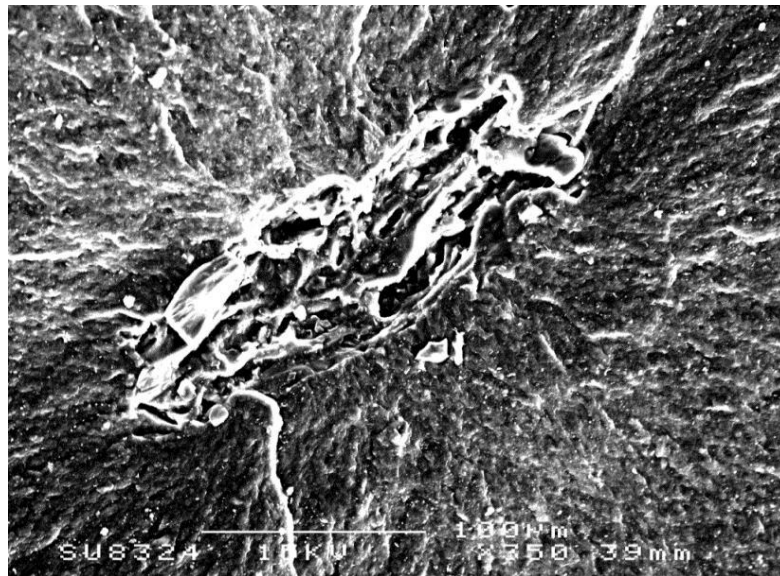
A magnified fracture surface showing microcracks propagating from an inherent flaw.
